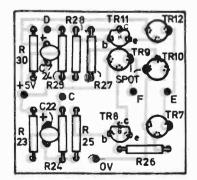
P.C.B. details of the servo amplifier and servo drive boards
